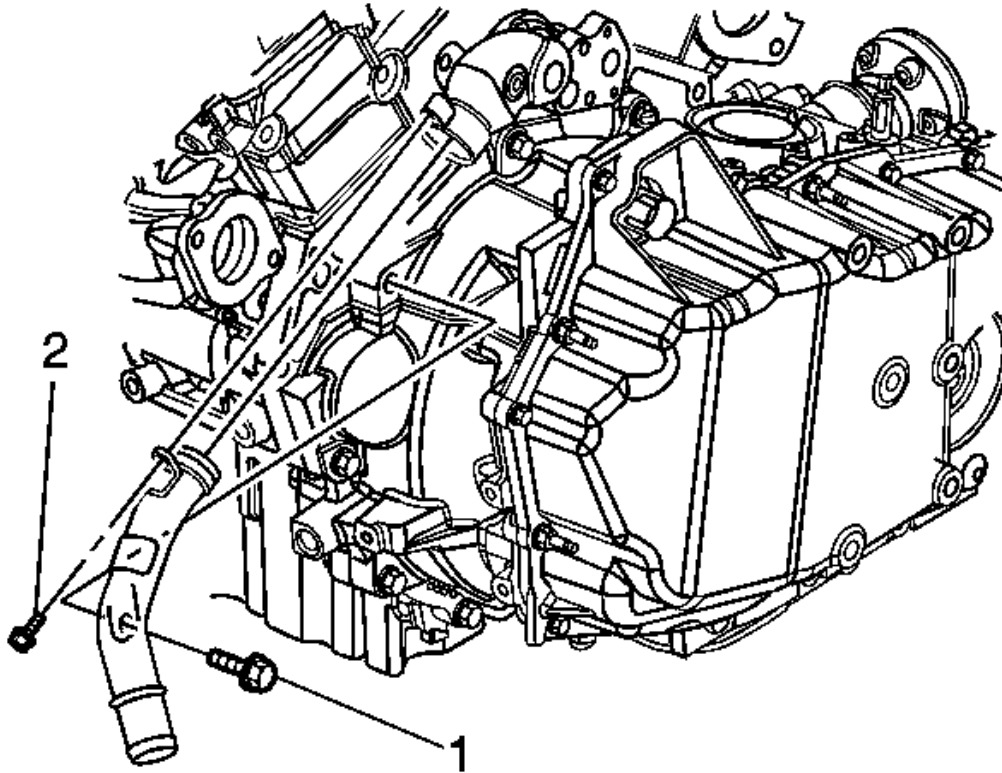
View Of Water Coolant Inlet Pipe Bolts & Coolant Inlet Pipe
